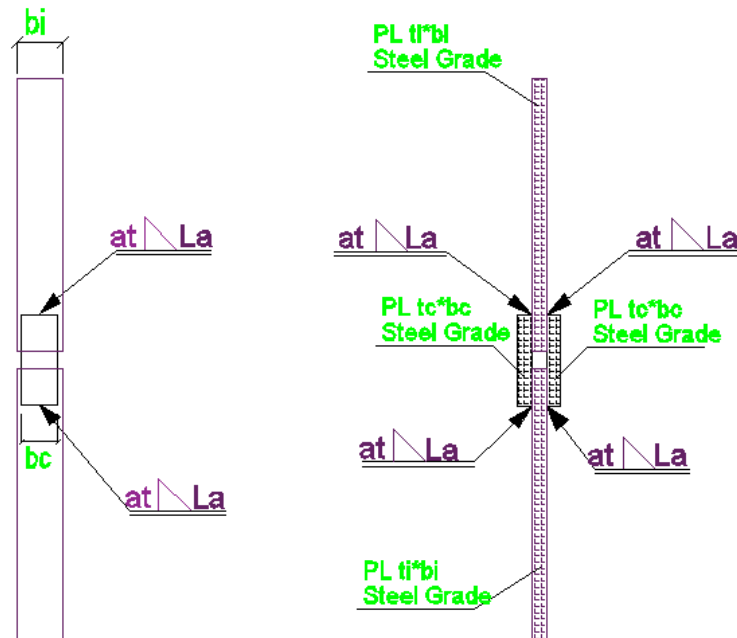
The configuration of specimens with longitudinal fillet weld
